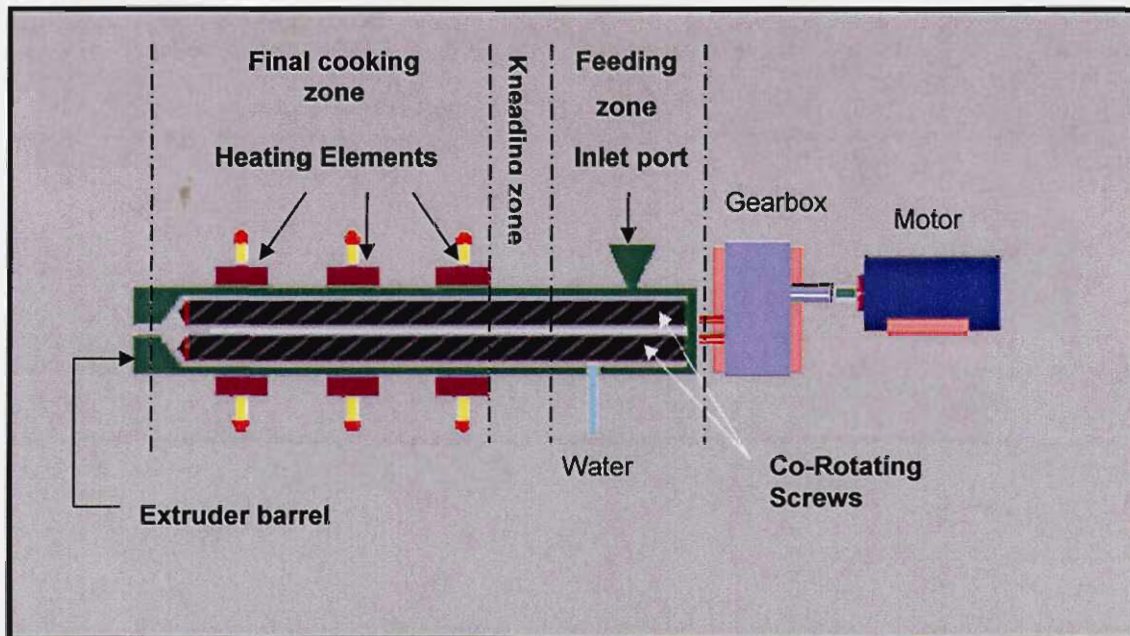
Extruder assembly of the co-rotating twin-screw extruder.
